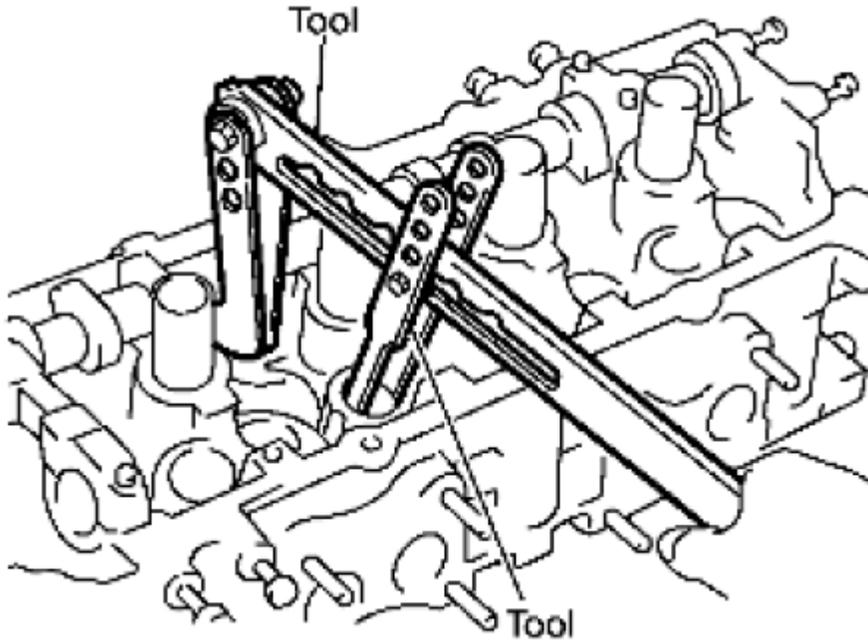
Removing Valve Collet, Valve Spring Retainer And Valve Spring Using Tool
